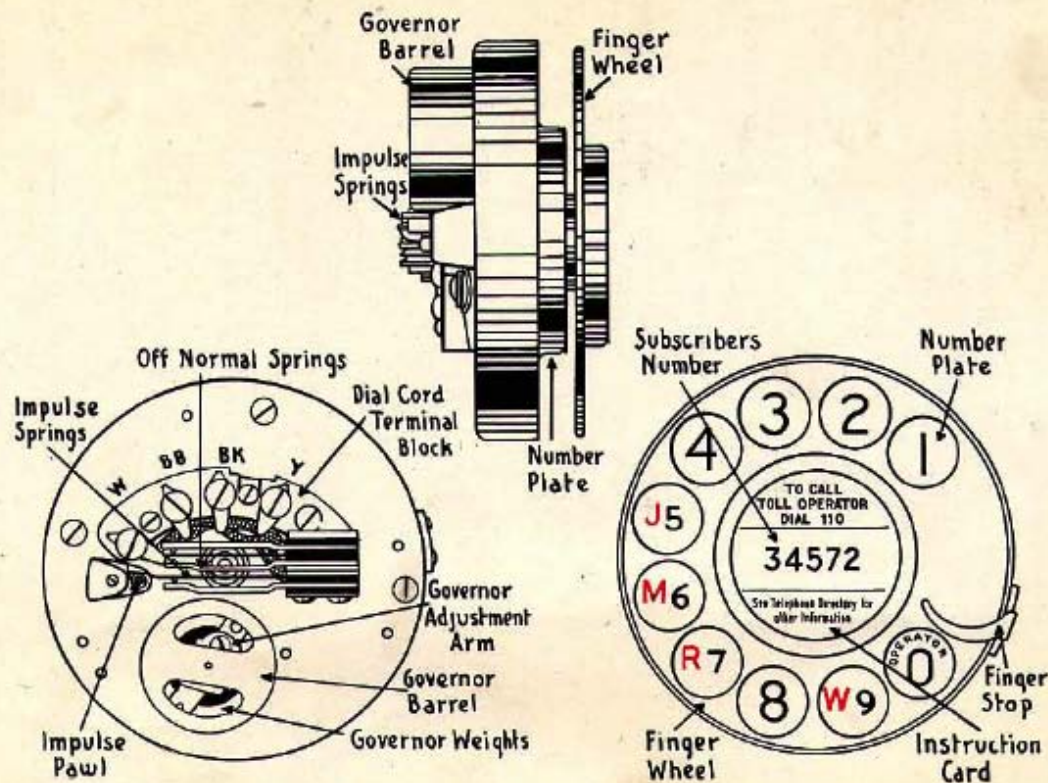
REAR, FRONT AND SIDE VIEW OF THE DIAL
